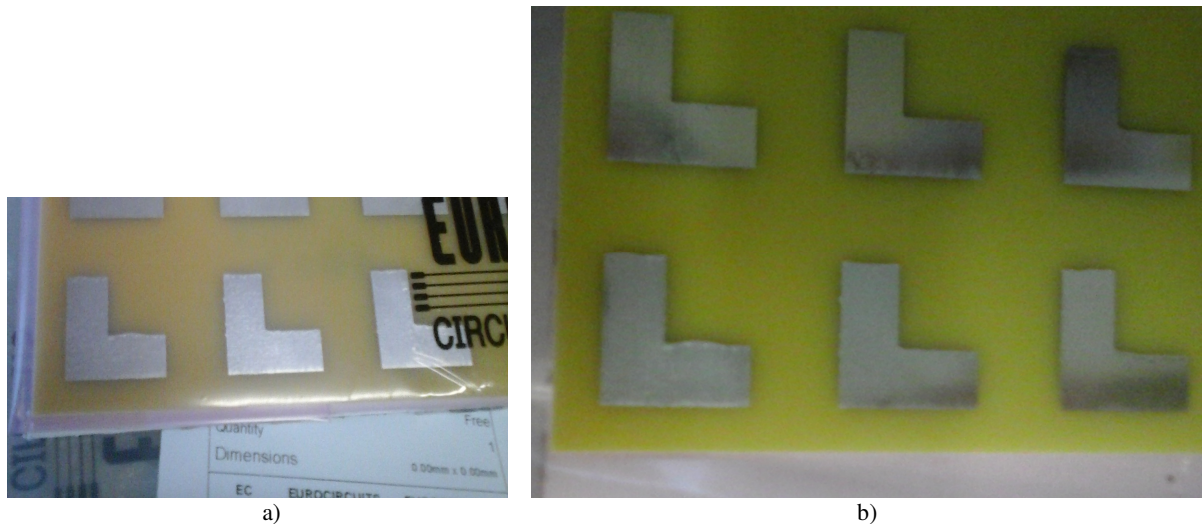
a) and b) Sample picture's of the small deformations in the metal patter of the PCB board.
